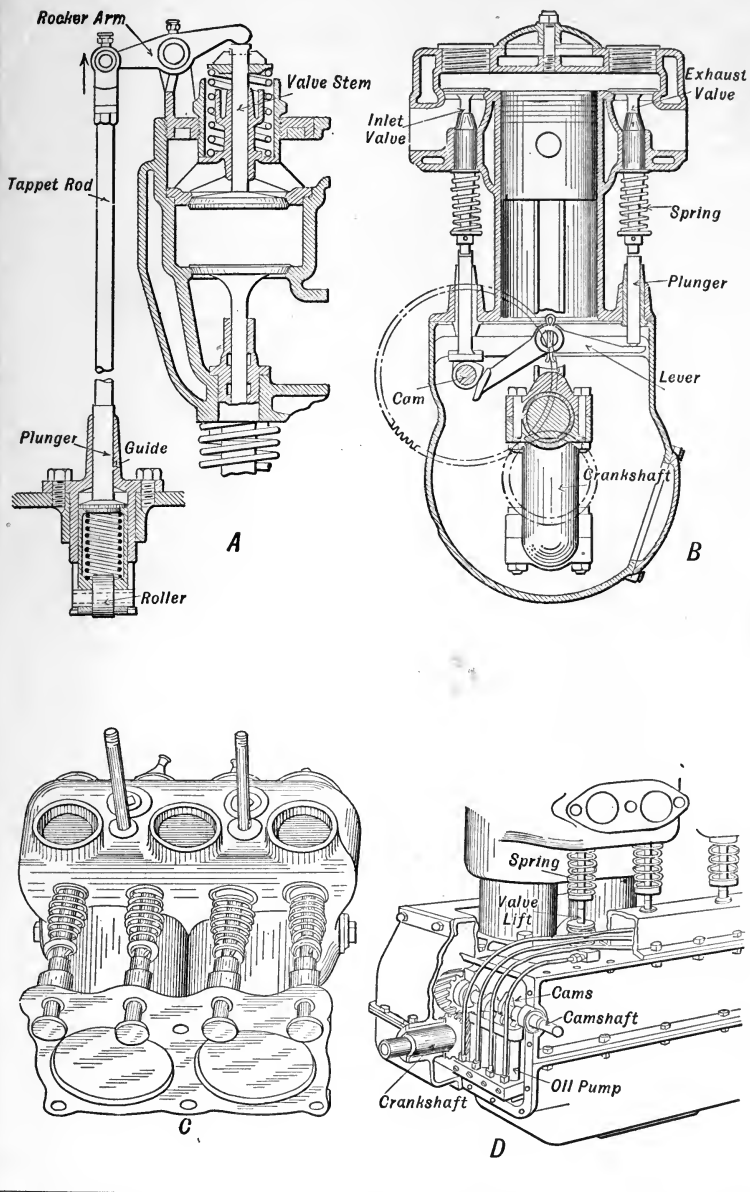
Defining Different Possible Methods of Valve Operation. A—Overhead Valve Actuated by Rocker Arm, Tappet Rod and Roller Type Cam Follower. B—Both Valves Operated from One Cam, "T" Head Cylinder. C—Valves of "L" Type Twin Cylinder Casting Operated by Mushroom Type Cam Followers. D—Suggested Method of Indirect Valve Operation.
